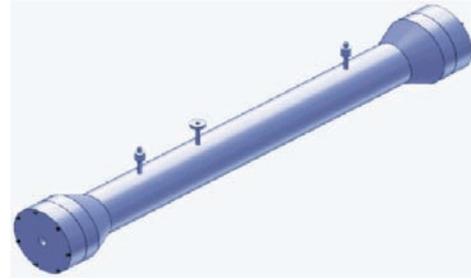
A CAD design of sealed CRDS cell of 80cm cavity length with safety cover.
